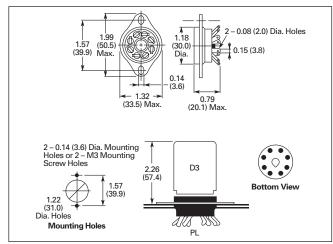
D3PA4 — Approximate Dimensions in Inches (mm)
